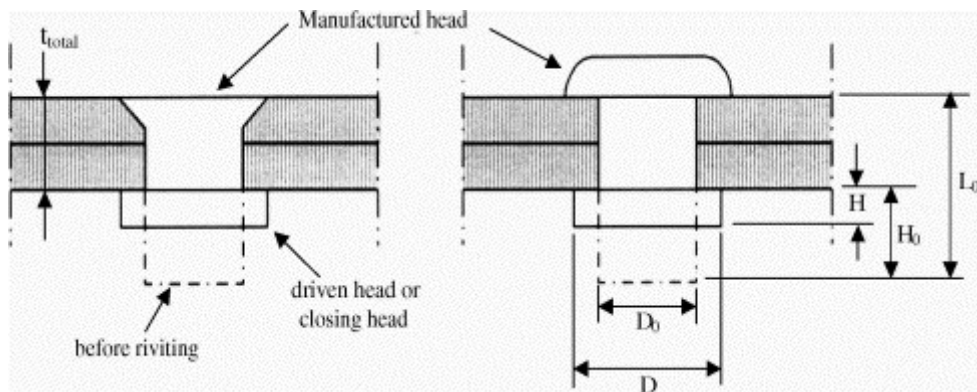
Countersunk and protruding head rivet geometries [18]
